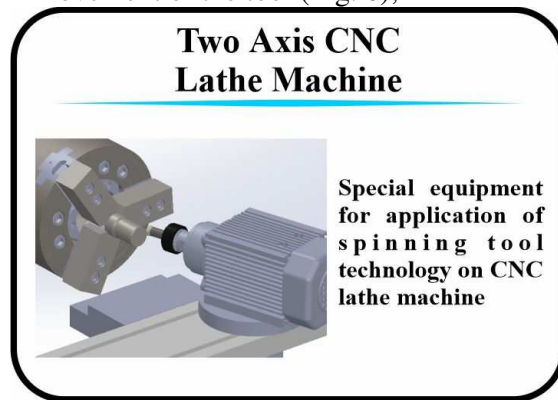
Lathe machine equipped with additional spindle for rotating simultaneously the workpiece and cutting tool
